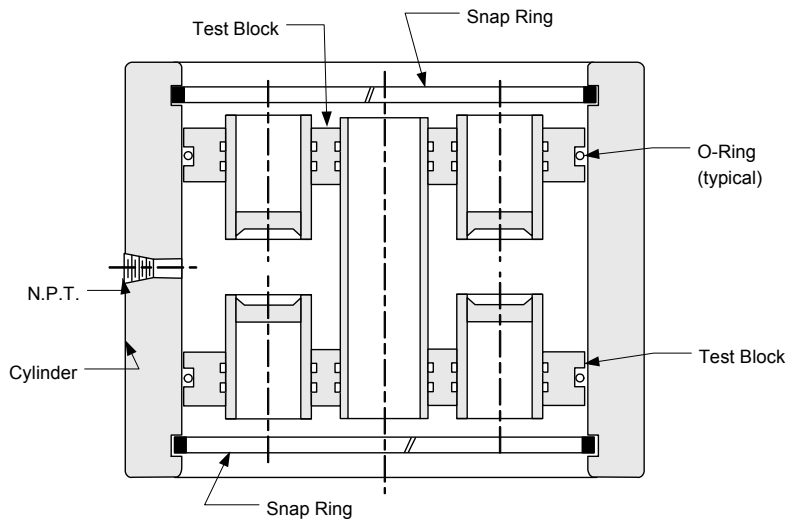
C.2 –Typical Test Fixtures for Expanded or Welded Tube-To-Tubesheet Joints
